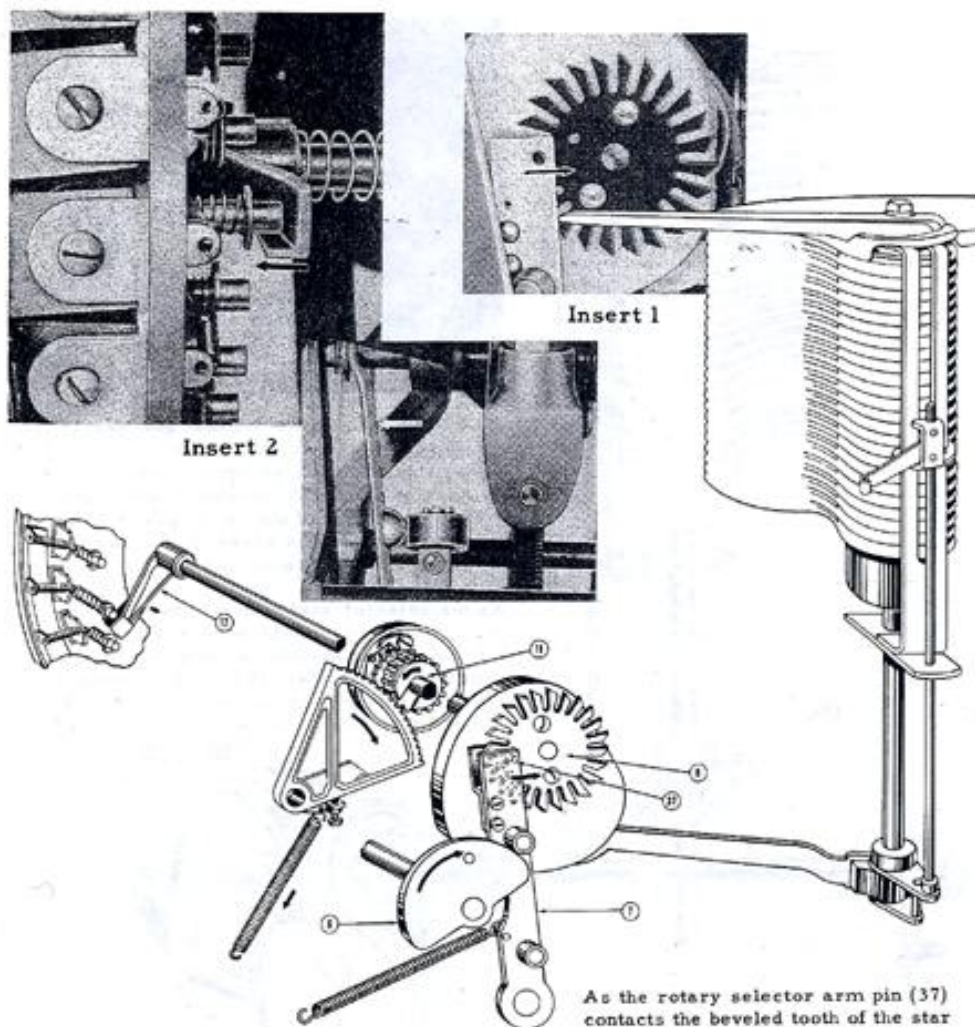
At this time, the tray take-out cam (6) moves the rotary selector arm (7) into the locked position in the star wheel (8), (see insert 1). With the shaft locked, the selector segment gear returns to the rest position as the pinion gear (11) is allowed to ratchet, in that direction, through the dog and pin assembly on the selector brake disc.
